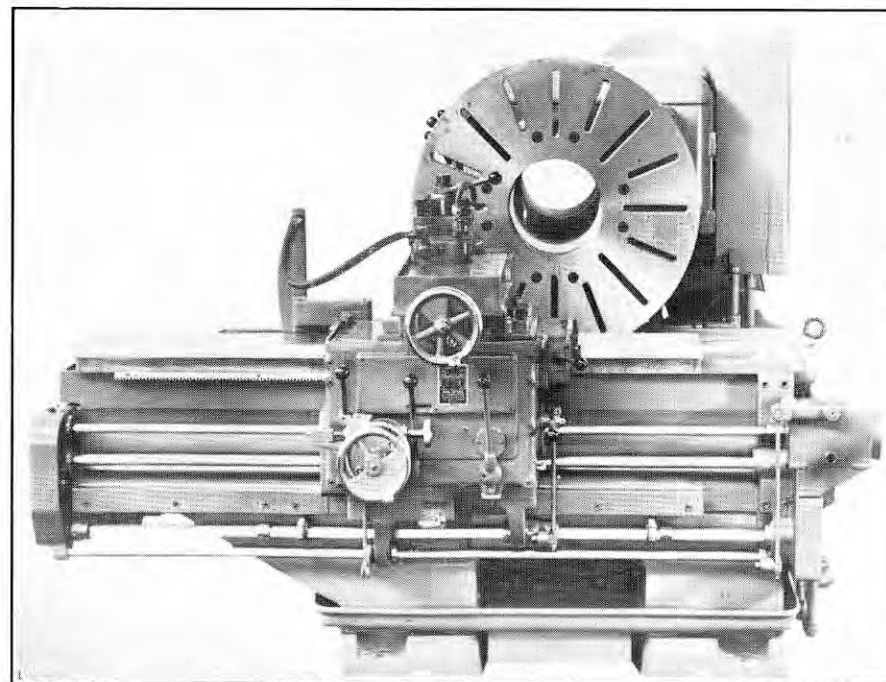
LODGE & SHIPLEY RIGHT-ANGLE CHUCKING LATHE; E. H. JONES (MACHINE TOOLS), LTD.
